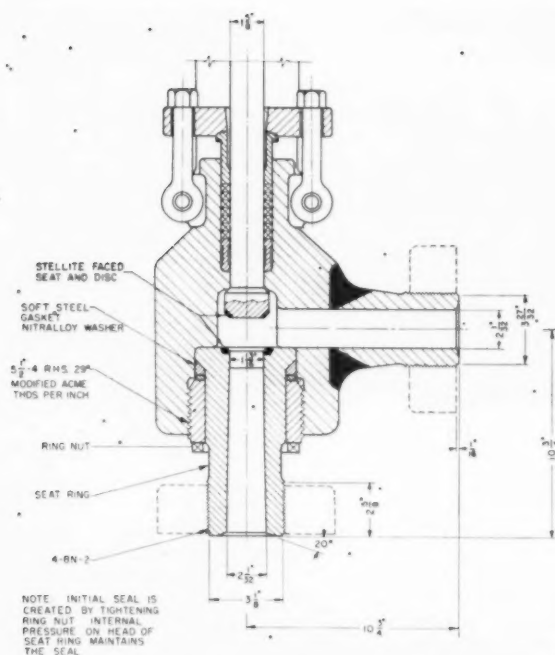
SHUTOFF-VALVE ASSEMBLY
